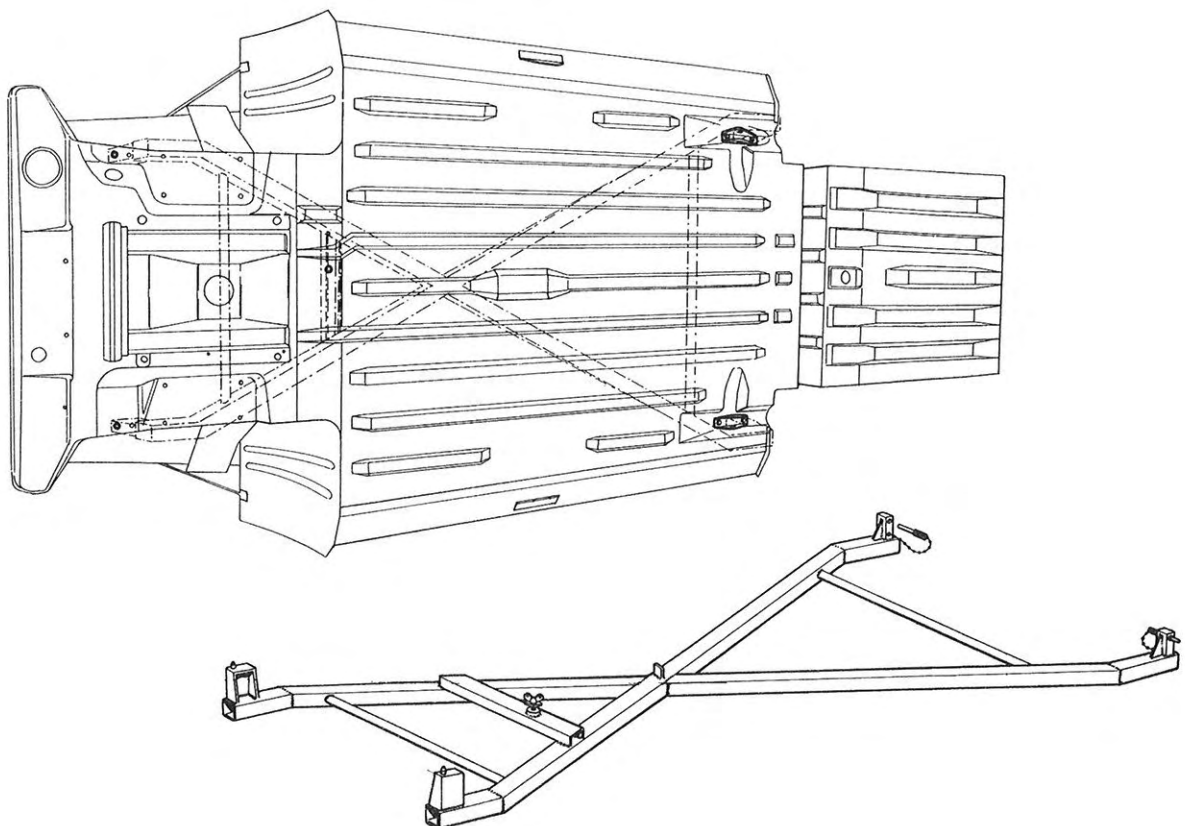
Checking the body dimensions. Tool Saab 93-150
